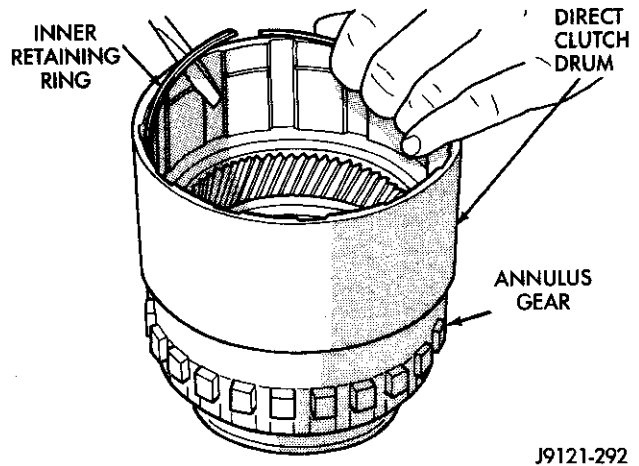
Clutch Drum Inner Retaining Ring Removal
